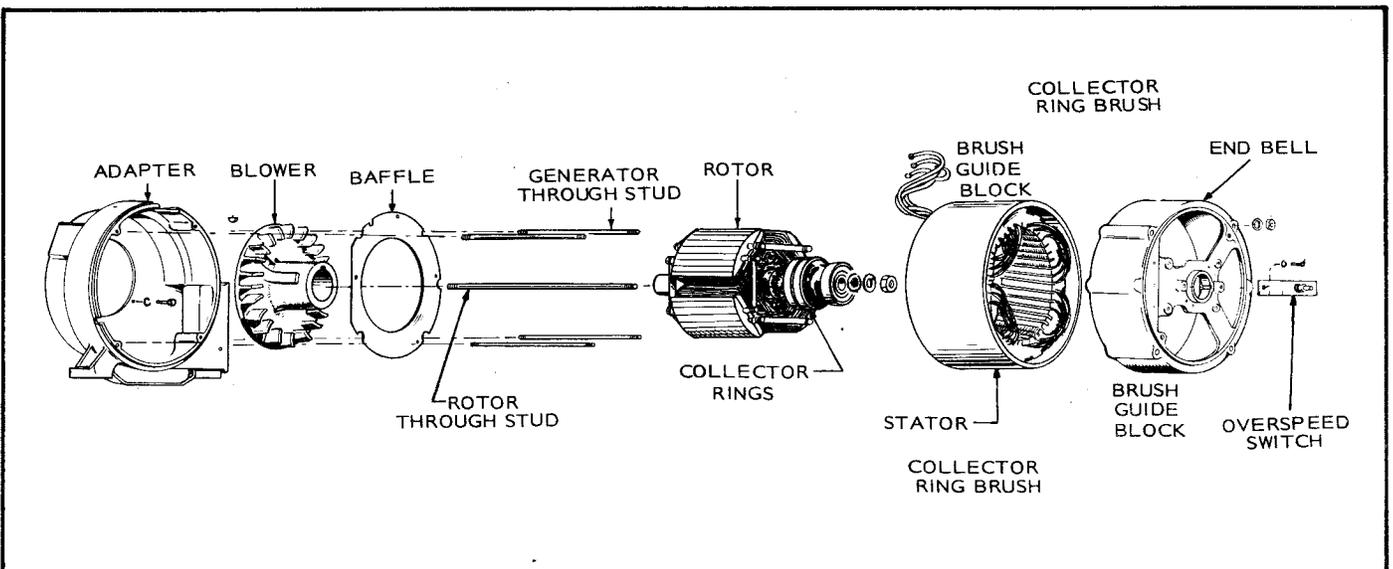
REVOLVING FIELD GENERATOR ASSEMBLY.
